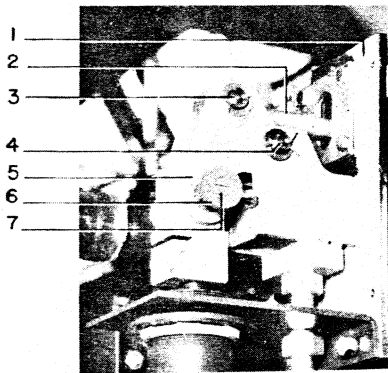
Method of Mounting Tanklifter for Removal of Tanks
